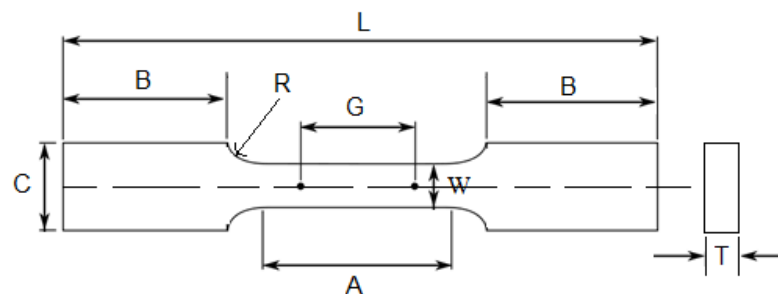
Examples of rectangular (flat) tensile test specimen
